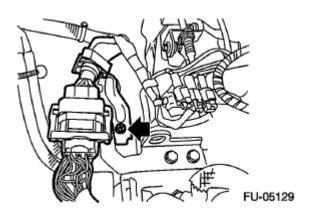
Locating Bulkhead Harness Connector Bolt Courtesy of SUBARU OF AMERICA, INC.
